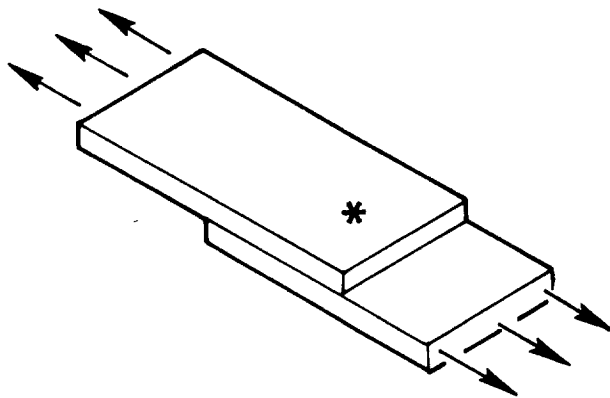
Joint Configurations Applicable to Fabrication of a Shear Web Beam
